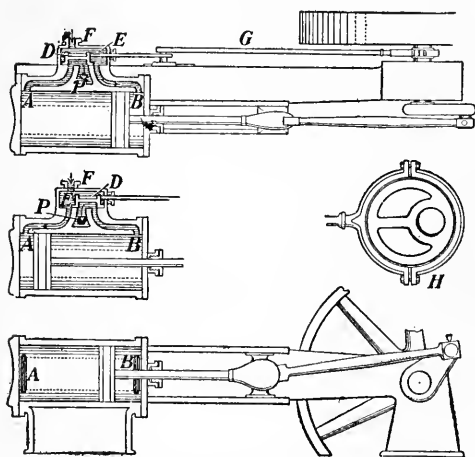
Steam engine. *A* and *B*, ports; *D*, slide valve; *E*, steam chest; *F*, pipe to boiler; *G*, eccentric rod; *H*, eccentric.
